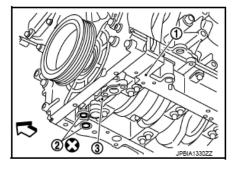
Identifying O-Rings On Bottom Of Lower Cylinder Block And Oil Pump Courtesy of NISSAN MOTOR CO., U.S.A.
